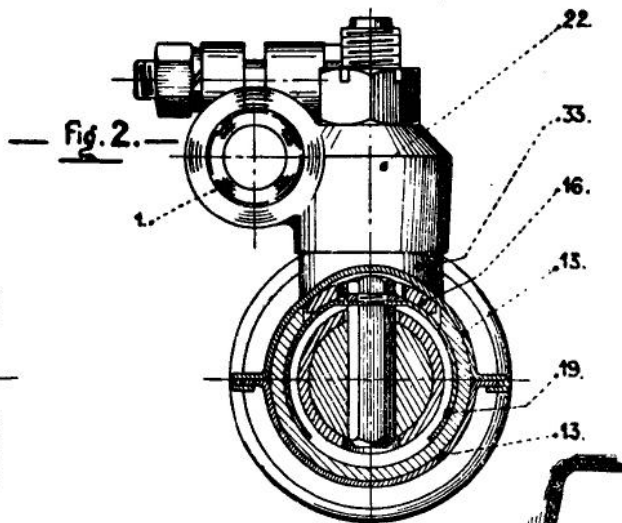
SECTIONAL VIEW THROUGH DOWEL PIN
